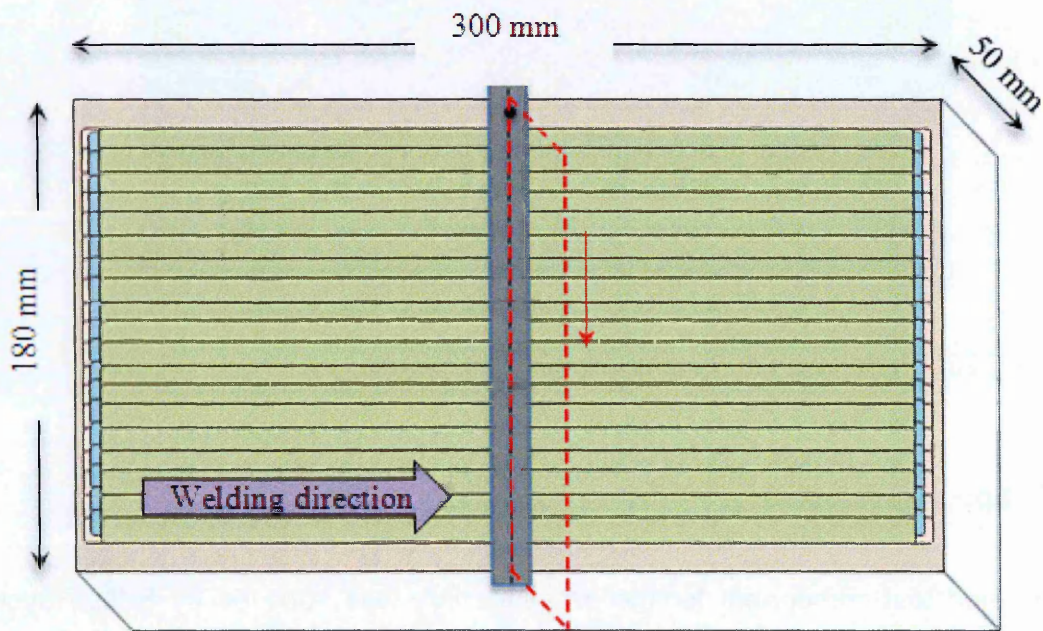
Schematic image of the clad plate showing the dimensions, direction of clad welding, cross-section of contour method measurement (red chained line), pilot start hole for WEDM cut and sacrificial strip applied to the clad surface.
